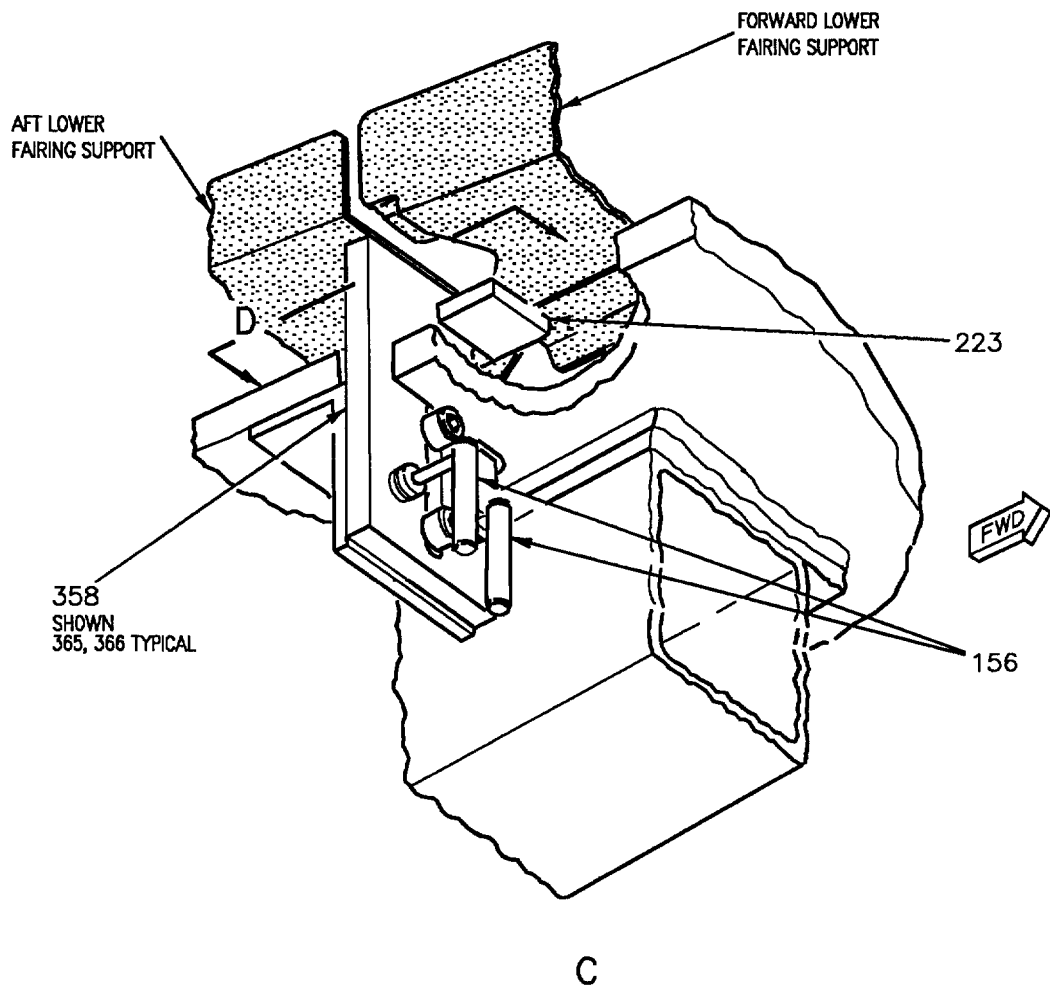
Inspection or Replacement - Lower Fairing Support (Sheet 3)
